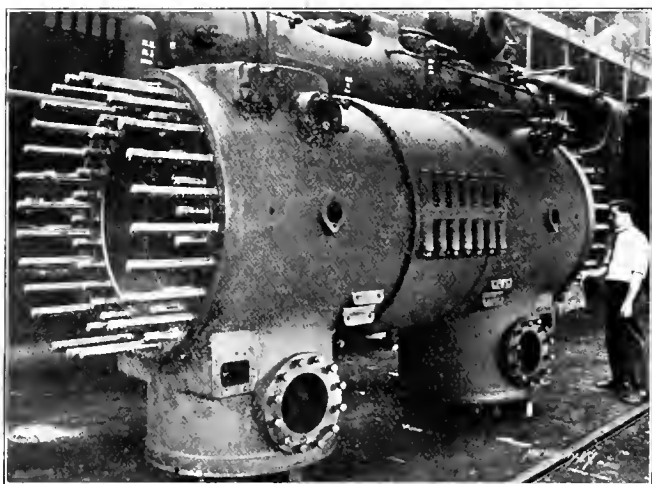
Completed Cylinder Casting with the Jacket Band in Place.
